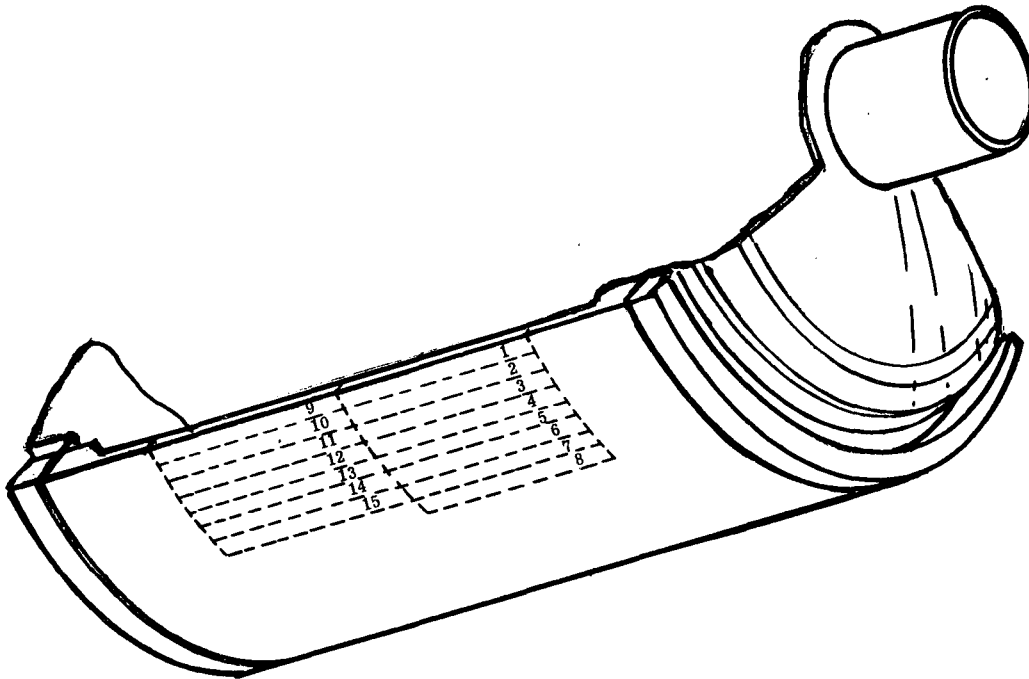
Sketch of Beryllia Bore Seal Capsule Assembly Section Showing the Location of Modulus-of-Rupture Specimens.
